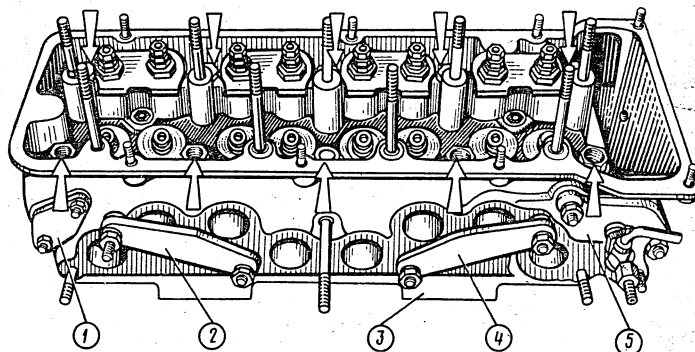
Checking the Cylinder Head for Tightness on Tester A.60334:
